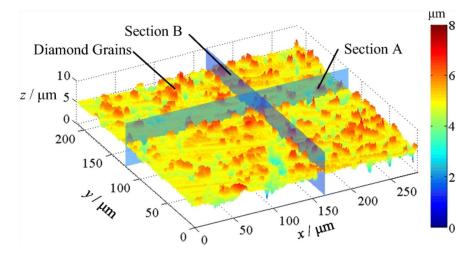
The micro-morphology of the surface of the diamond abrasive grinding wheel after dressing [11].
